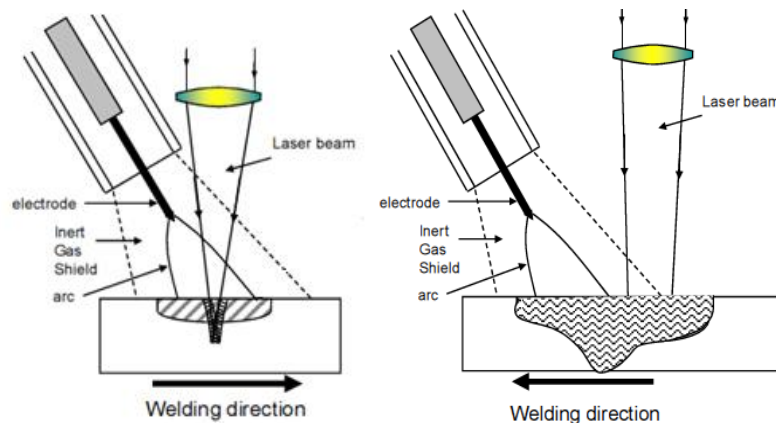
(a) Schematic of hybrid keyhole (b) conduction welding¹⁵⁵
